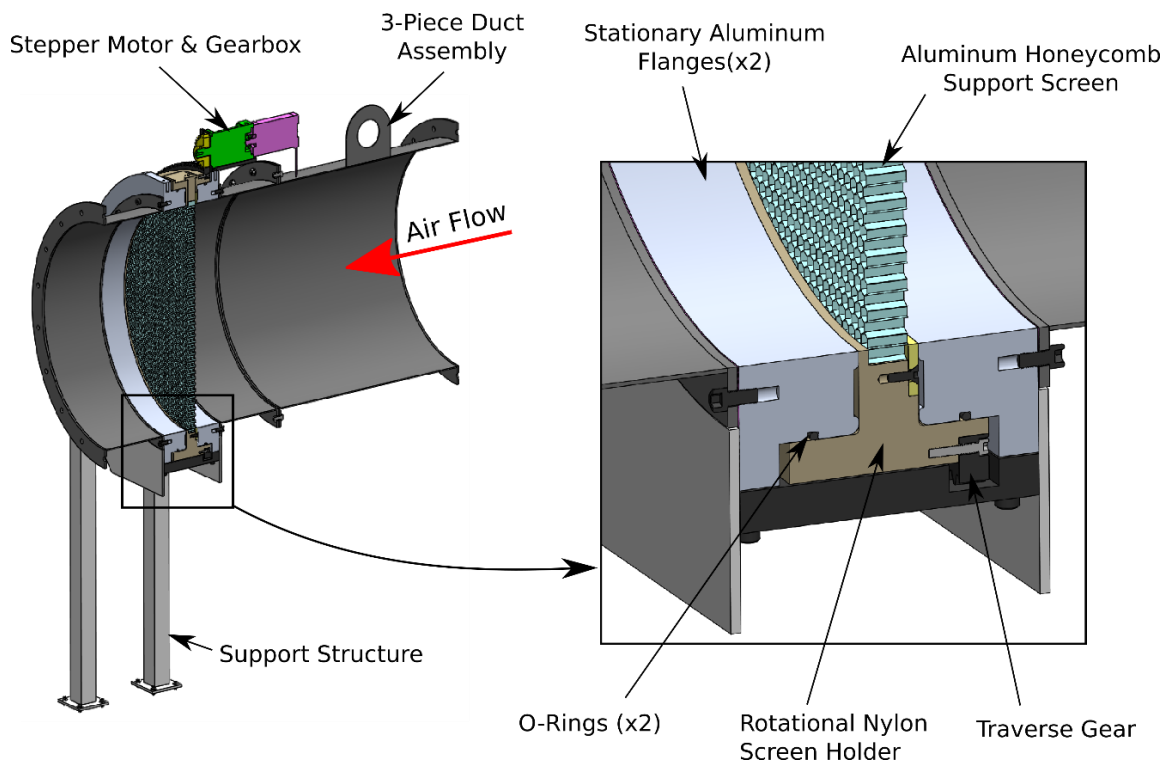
Cutaway View of the Inlet Distortion Traverse Assembly
